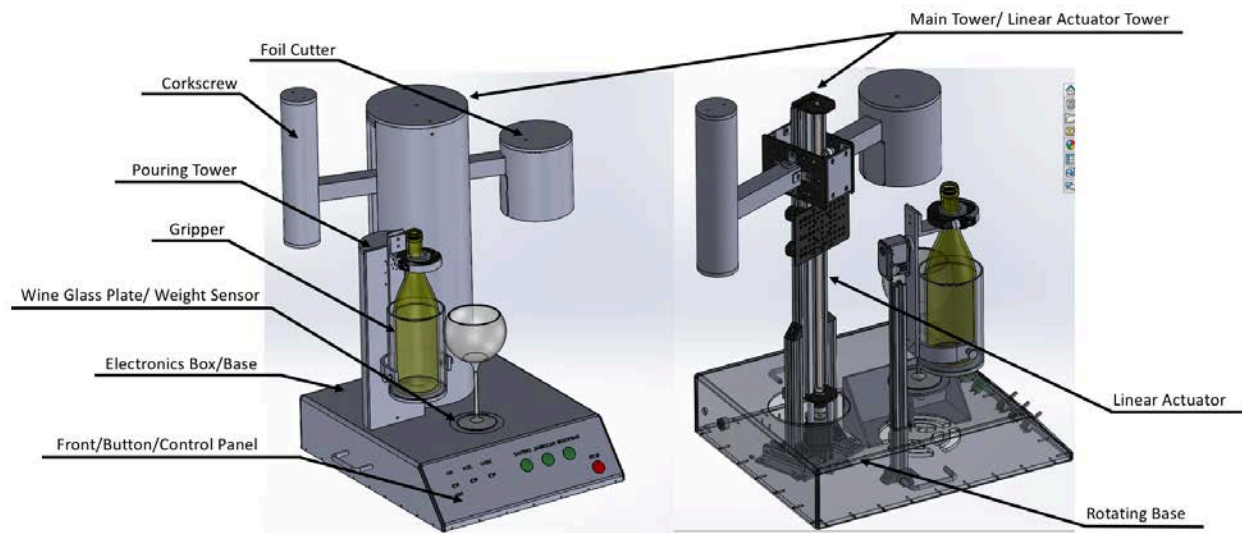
ISOMETRIC DRAWING OF WINE OPENER
